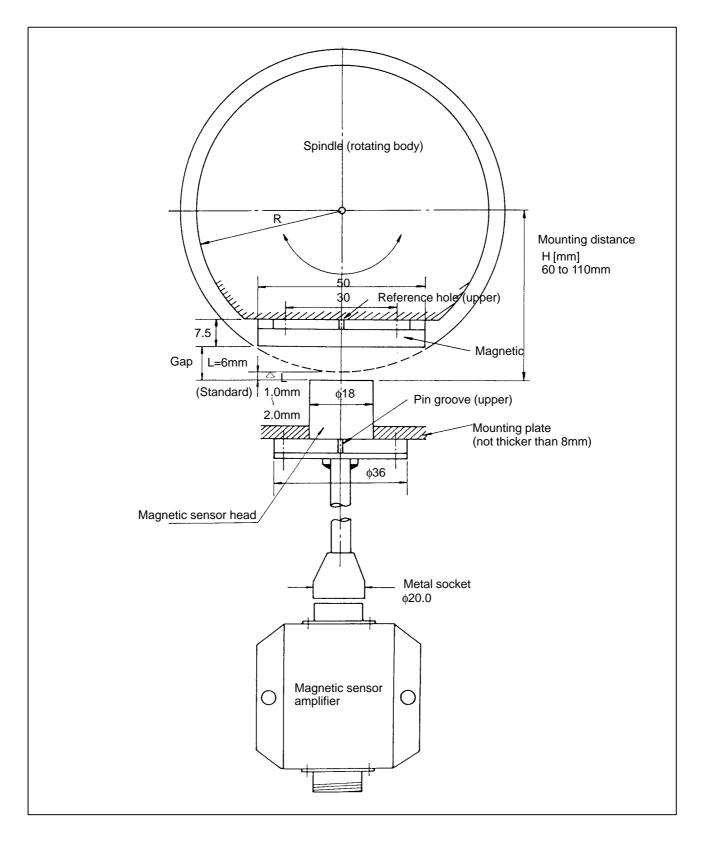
(a) Example of Mounting a Magnetic Sensor (1)
